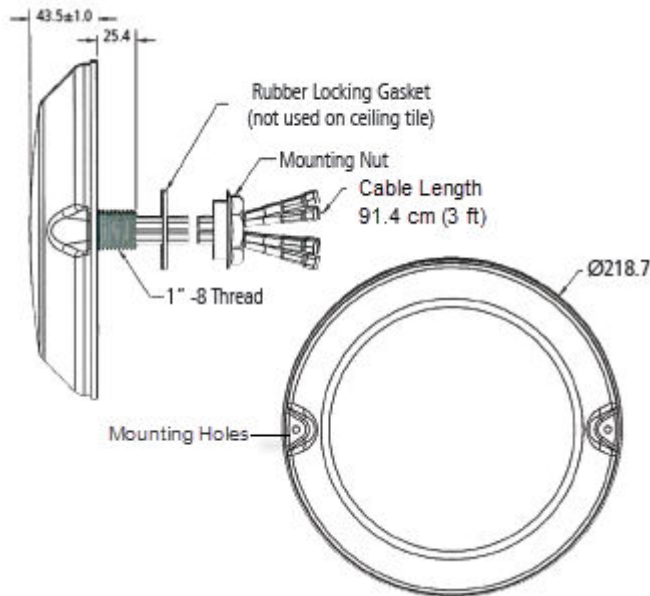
WS-AI-DX02360 Mounting Post and Mounting Nut
